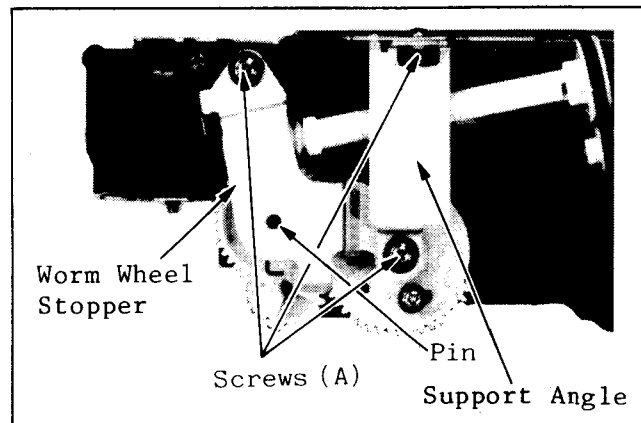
Adjustment of Cassette Up Gears-(5)
